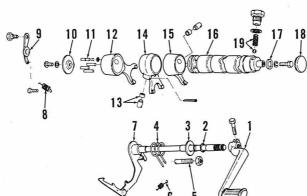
Exploded view of kickstarter. Gear (8) meshes with gear (16-Fig. Y4-18).
